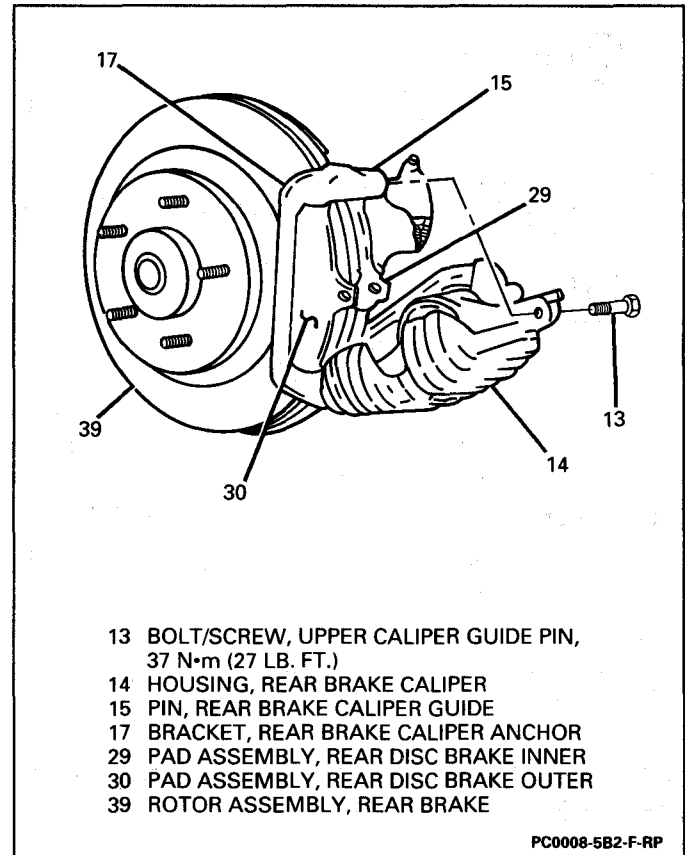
Rear Disc Brake Inner and Outer Pad Assembly Replacement
